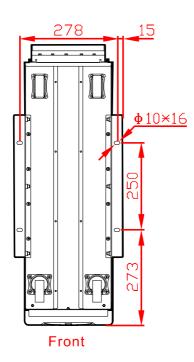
10/10S/10T/15/15S/15T/20/20S/20T installation holes size of pedestal (bottom view, unit: mm)
